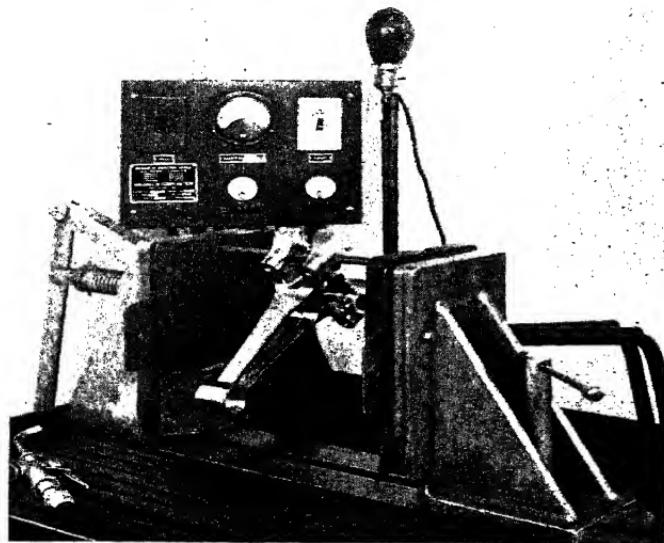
Testing mastor rod with magnaflux for cracks.
